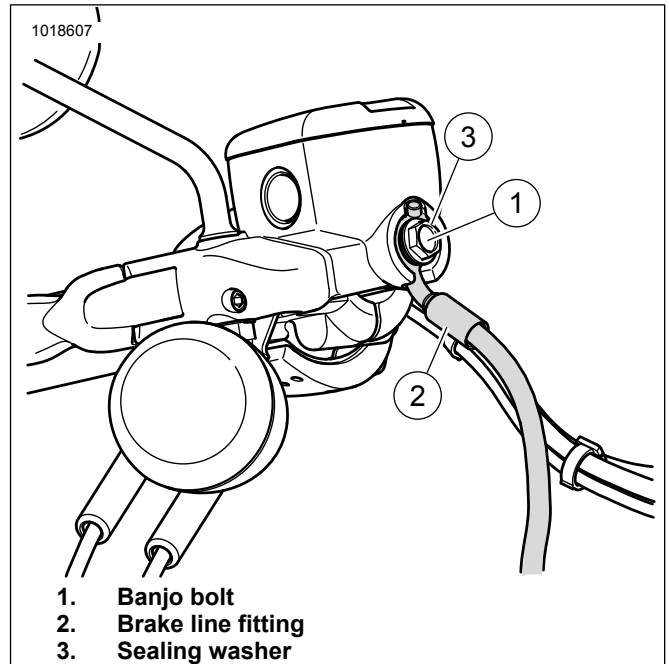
Brake Line Fitting, Banjo Bolt, and Seal
